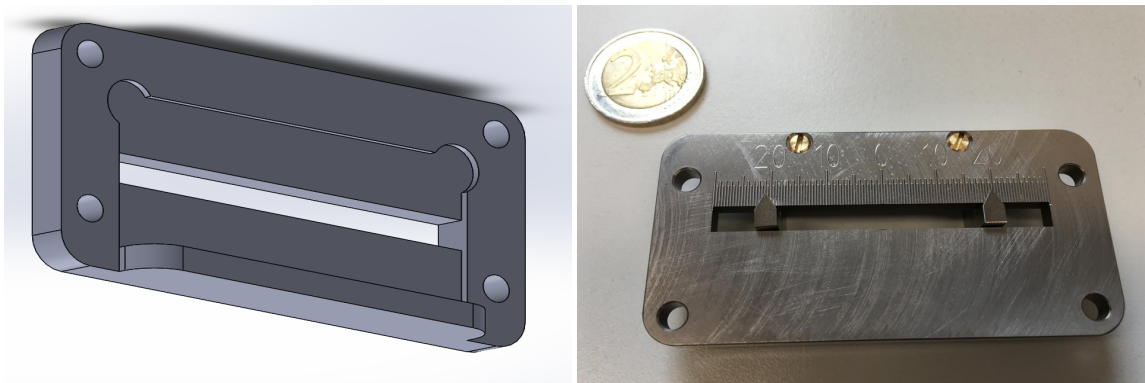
On the left a 3D model of a holder plate, view on the inside. On the right a top view on the same plate with a millimeter scale engraved on top, manufactured by the mechanical workshop out of titanium.
